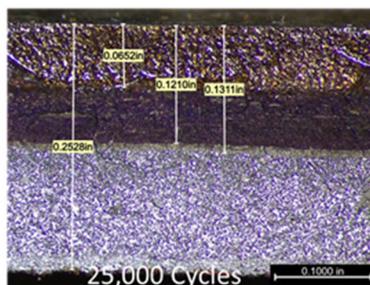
FRACTURE SURFACES OF UNREINFORCED PIPE SAMPLES (SAMPLES 1U AND 8U WERE BURST TESTS)
